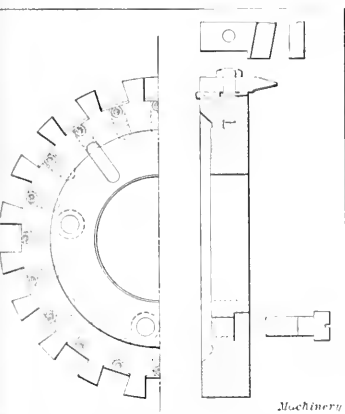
Elevation and Sectional Views showing Construction of the Cutter
